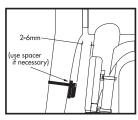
CLEARANCE BETWEEN MAGNET AND SENSOR
